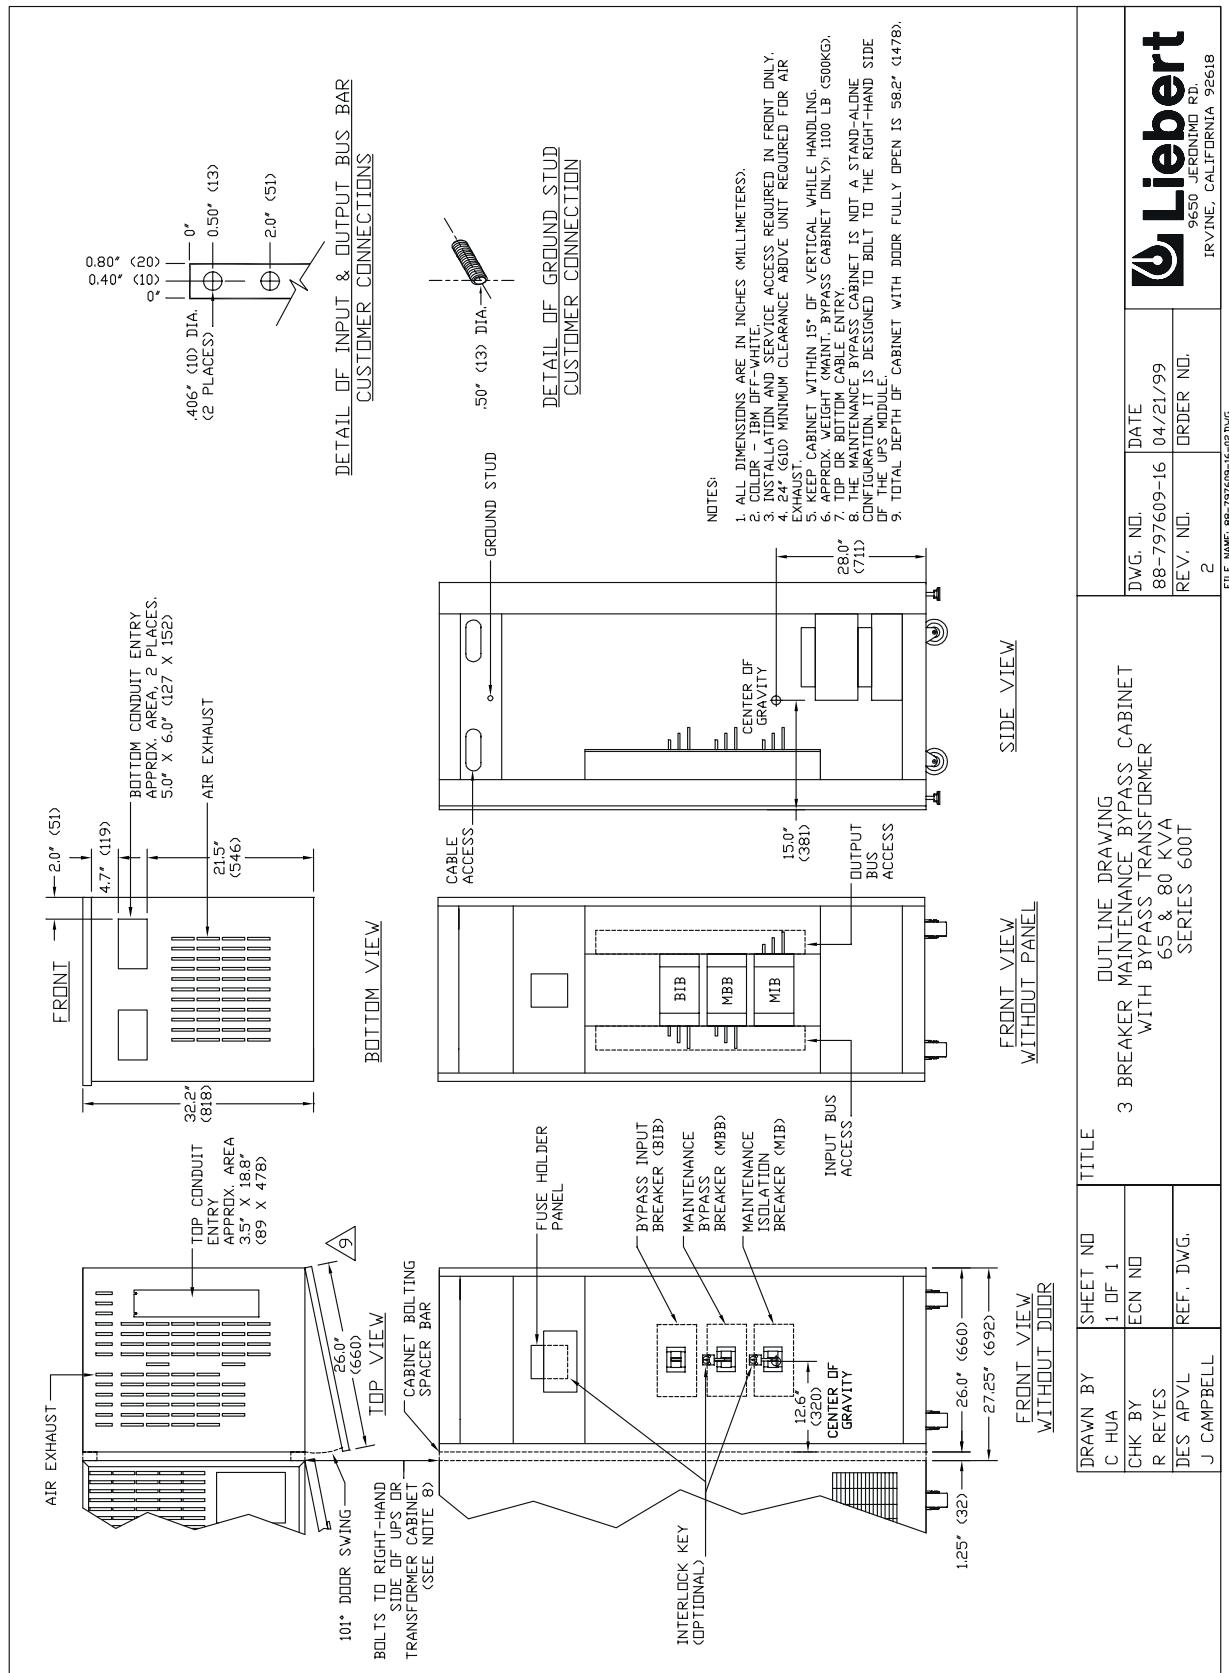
Outline Drawing, 3-Breaker MBC with Bypass Transformer, 65 & 80 kVA
